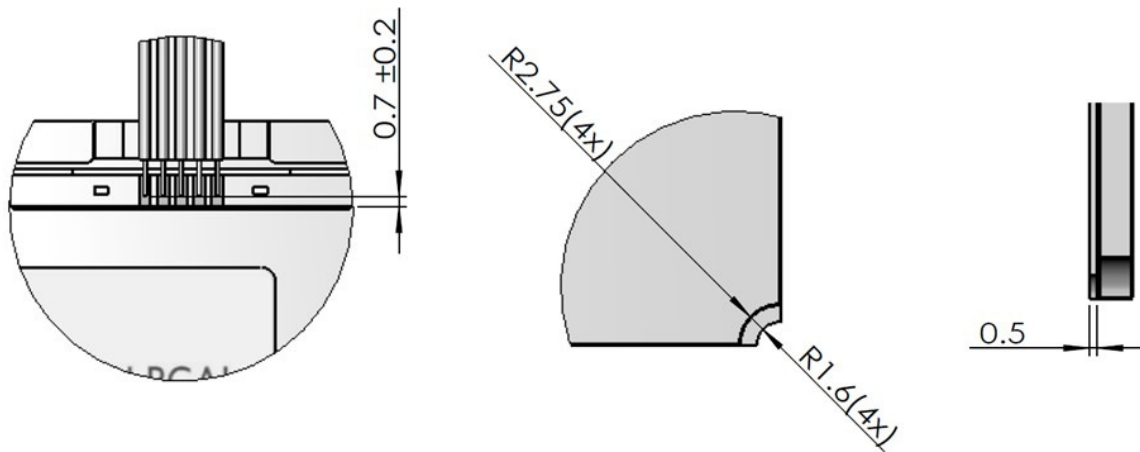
Detail A (left) B (center) and C (right) of Figure 8: solder orientation on PCB, screw openings and thickness of metal back plate - integration level 4
